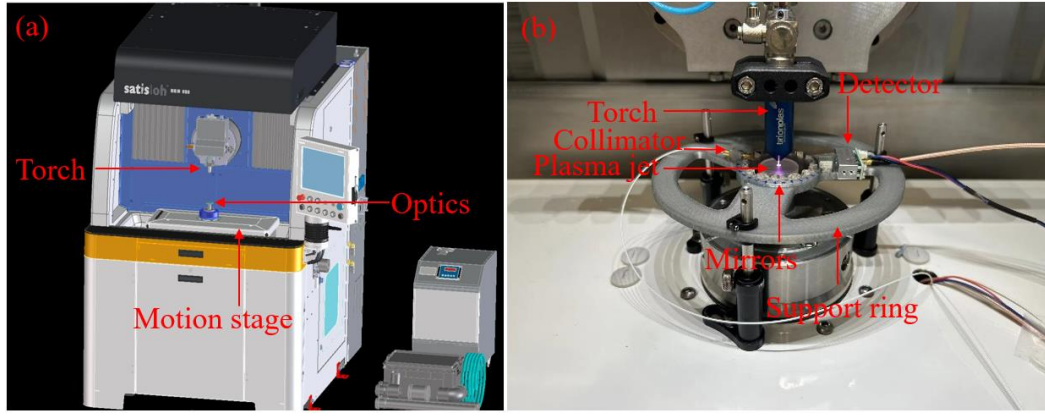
Experimental setup for plasma temperature measurement: (a) Satisloh® MPF machine tool and (b) the ring clamp integrated into the machine tool.
